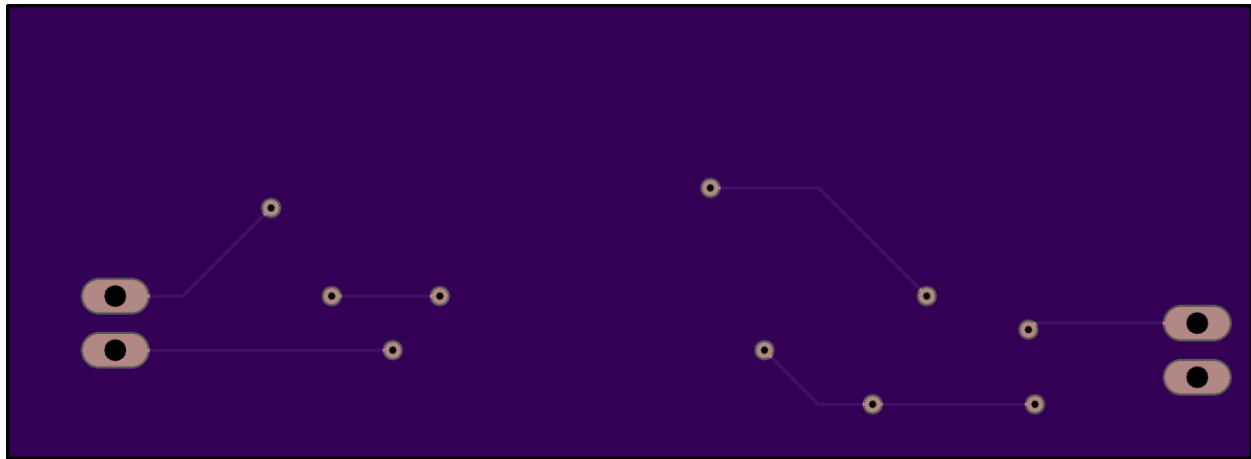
Manufacture preview of PCB by Oshpark. (Bottom)
